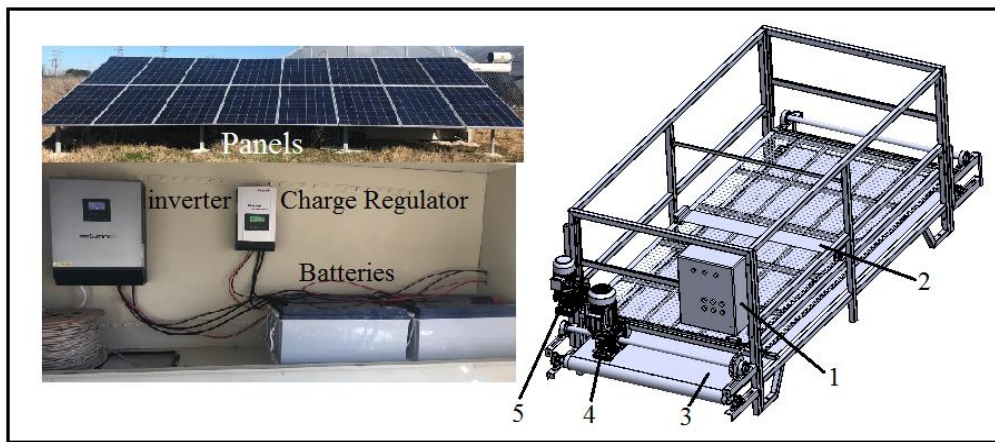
Vermicompost production facility 1. Control Panel 2. Double bladed harvesting knife 3. Conveyor band 4. Electric motor operating the knife 5. Electric motor operating the conveyor band
